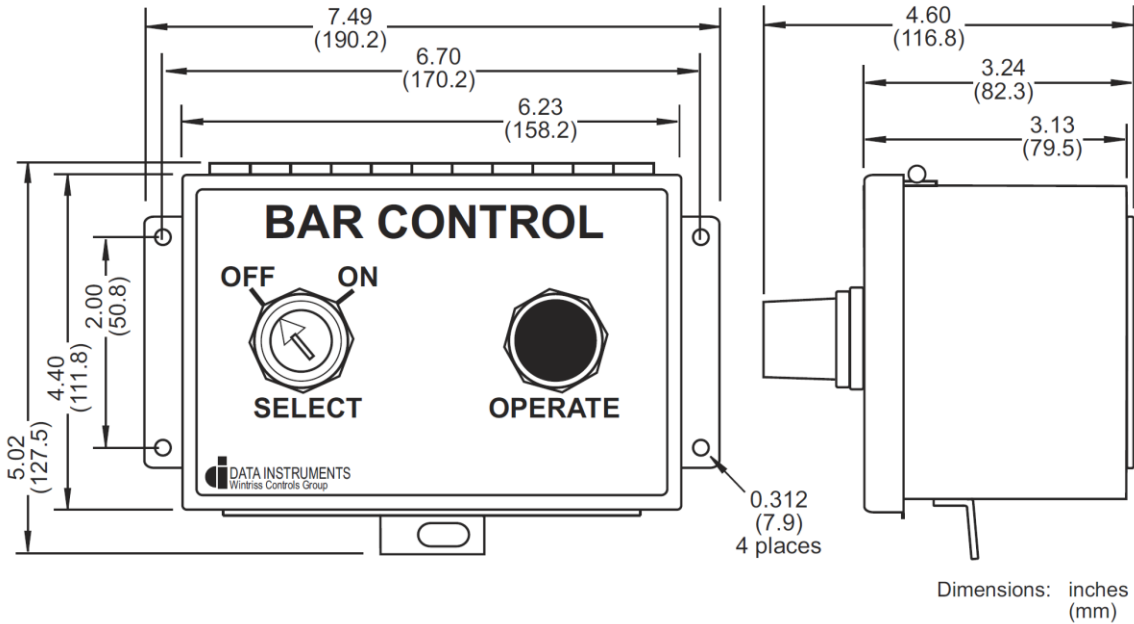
Bar Control Enclosure: Mounting Dimensions
